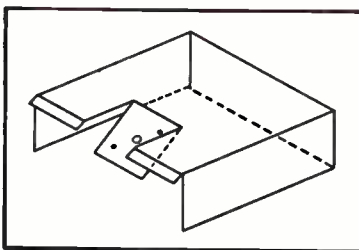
Sketch of chassis arrangement to provide for shielding between two decks of record playback switch.
